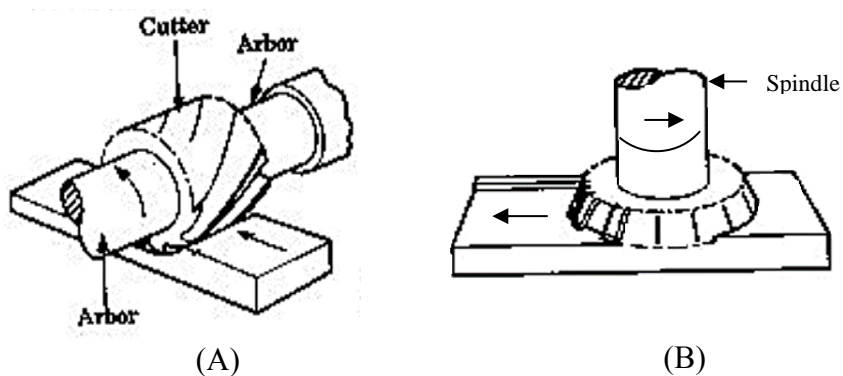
Different Types of Milling Process (A) Peripheral Milling; (B) Face Milling [29]
